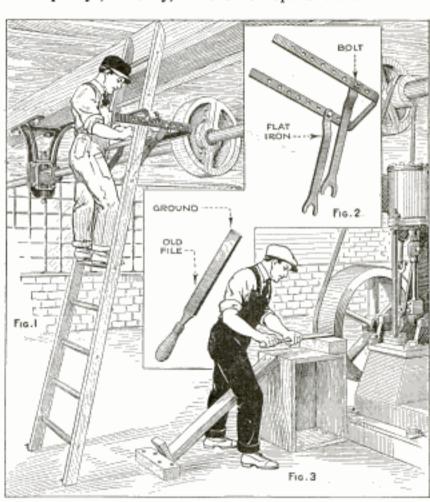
Illustrates the Fixture Used to Turn Down Wooden Pulleys That have Warped. Fig. 3 Shows How the Faces of Steel Flywheels and Pulleys are Finished to Look like New
